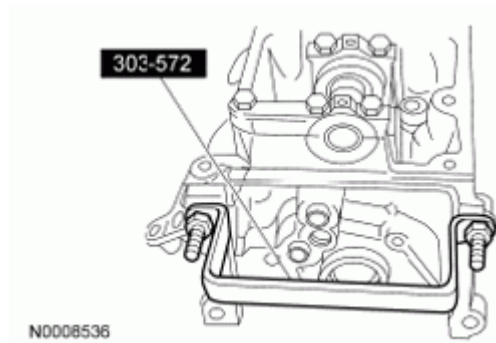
Installing Cylinder Head Remover/Installer On Both Ends Of Cylinder Head
